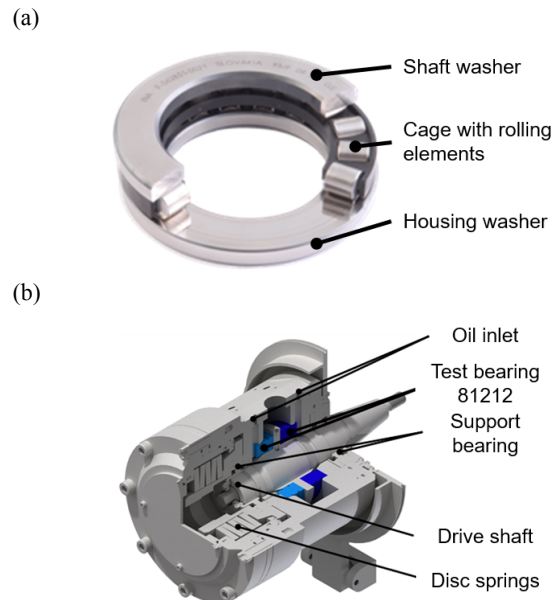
(a) Sectional view of the used cylindrical thrust roller bearing and (b) FE8 test rig according to DIN 51819-3 [33].
